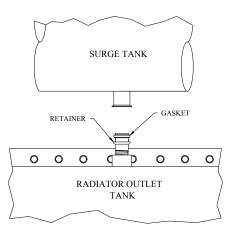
B - SLIDE THE COUPLING RETAINER RING AND RUBBER GASKET ONTO THE PIPE NIPPLE.
